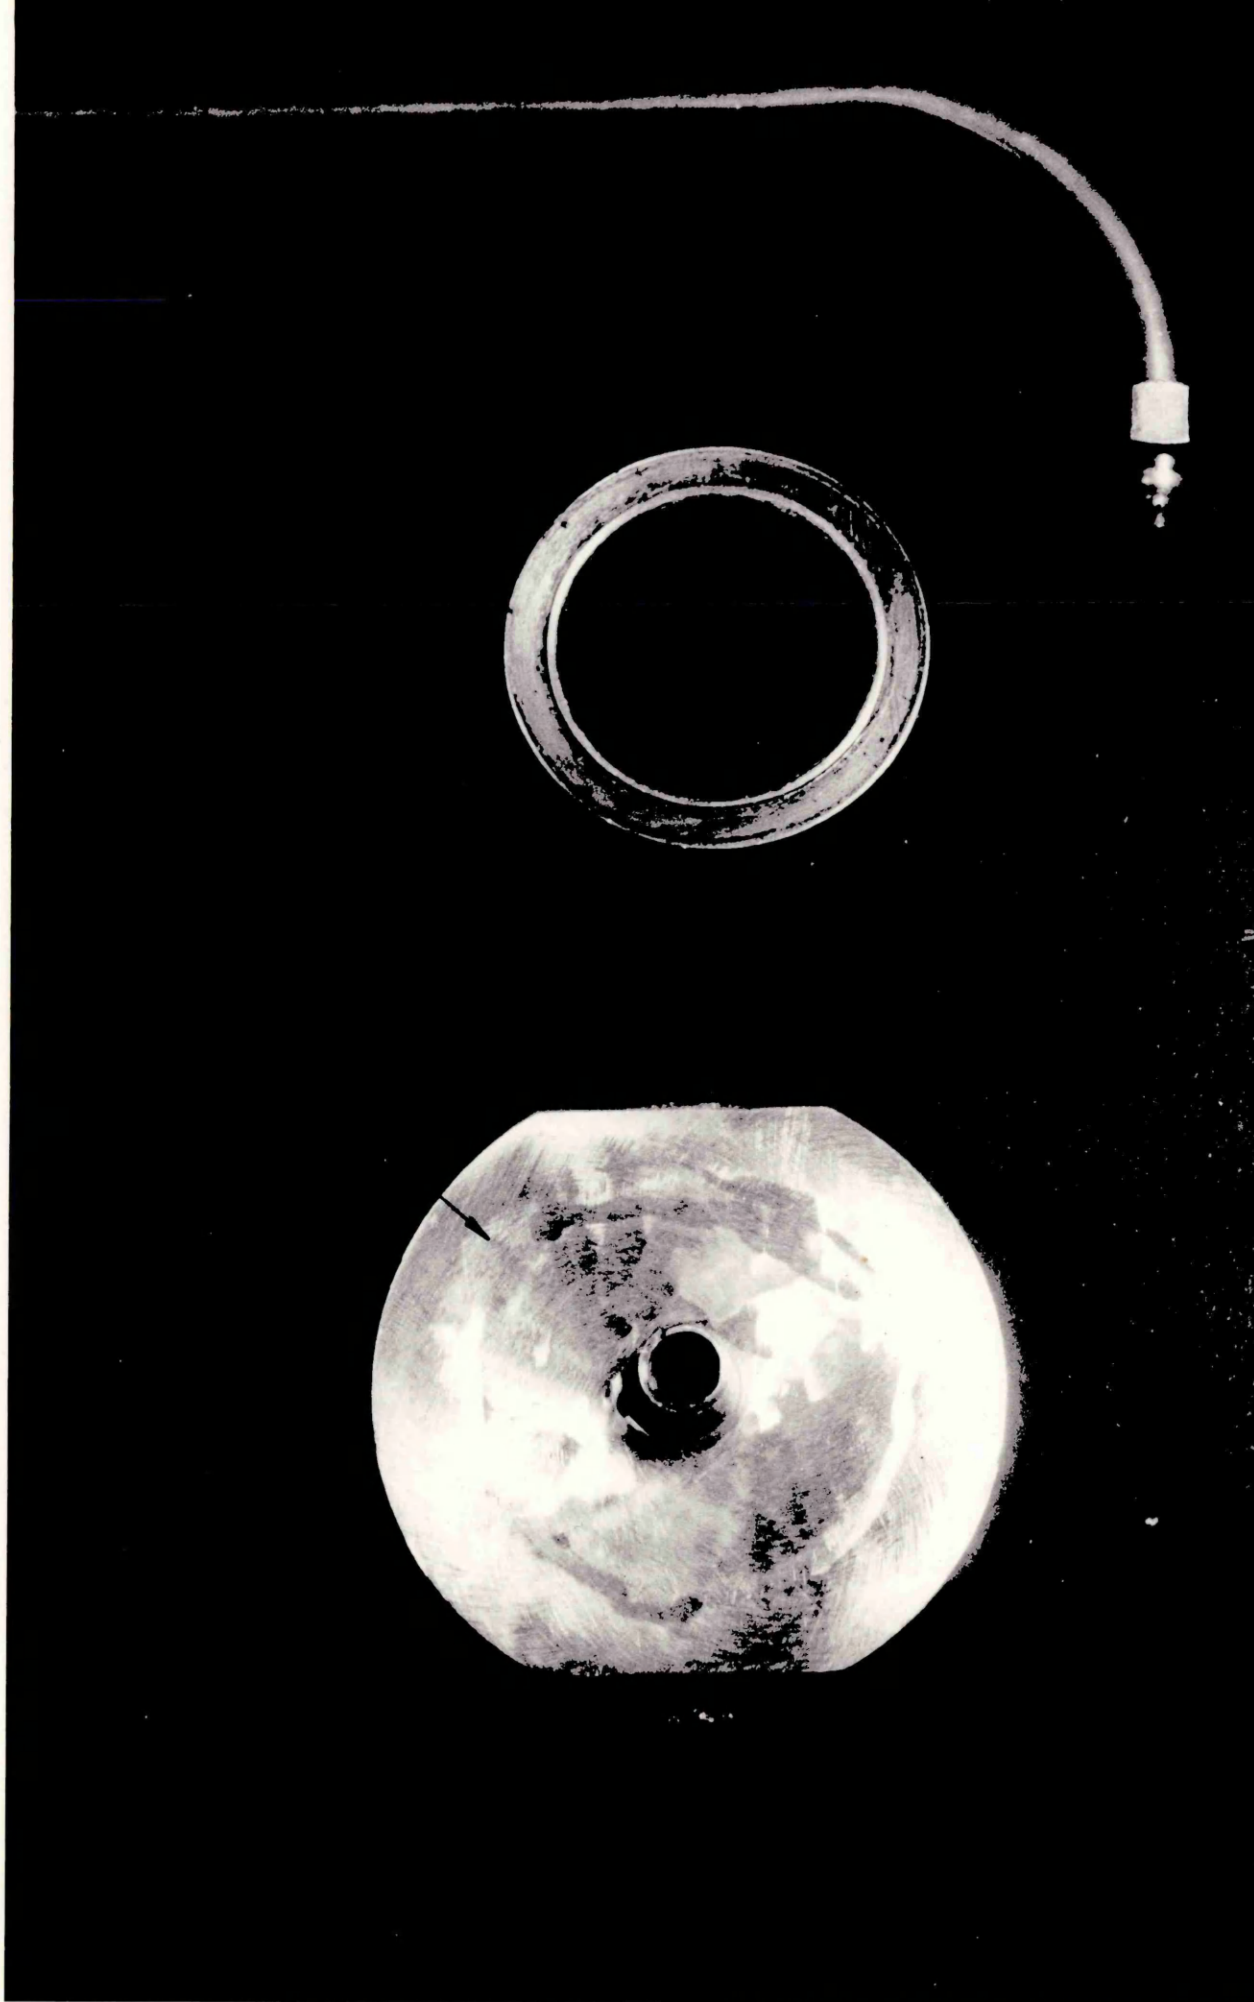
SECTION VIEW OF THE TAPERED BORE
